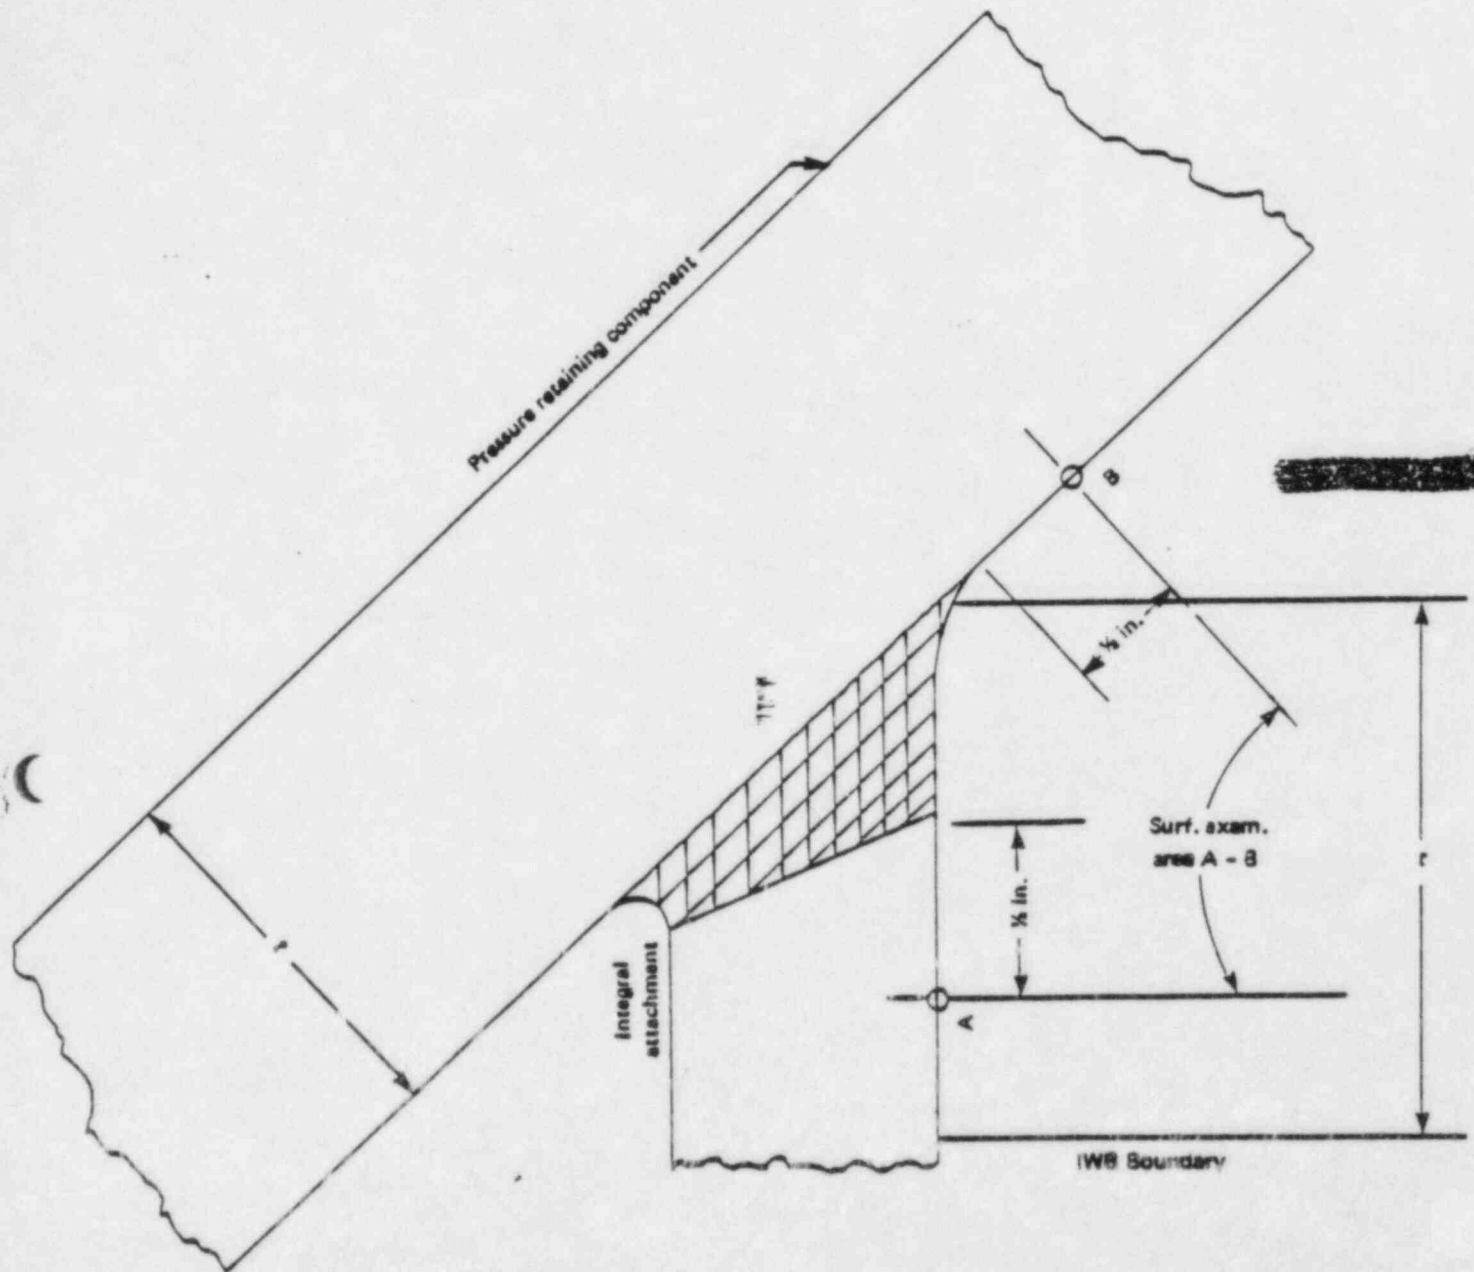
INTEGRAL ATTACHMENT WELD
